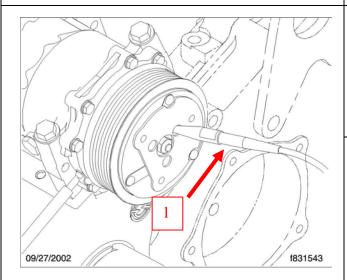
Using detector probe to check for leaks at the compressor front shaft seal. Leak detector probe (Ref. 1).
